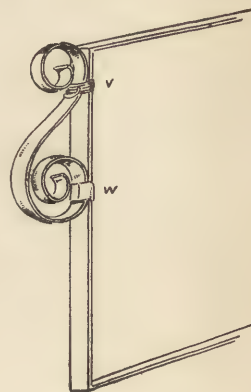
SIDE VIEW OF THE CARD - HOLDER (Design 230).
